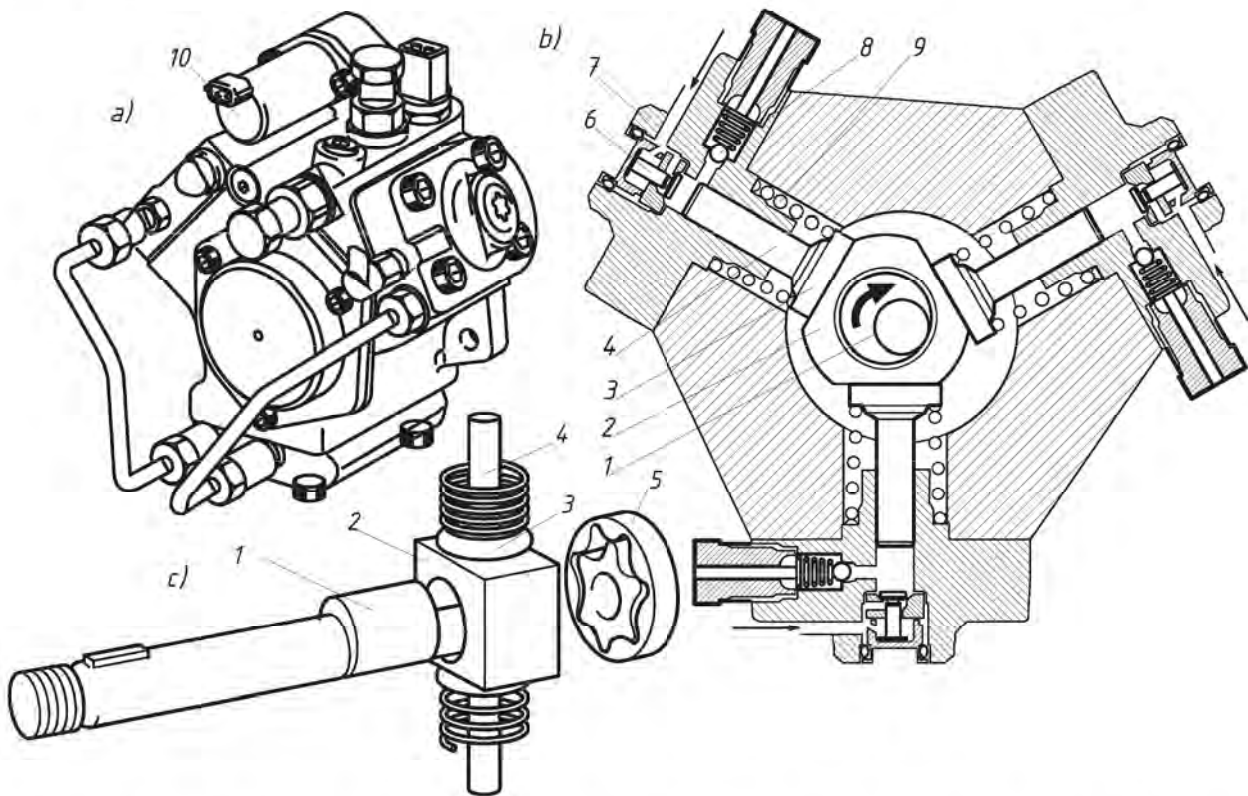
Delphi type DFP3 plunger pump for Common Rail systems of high-speed diesel engines: *a* – general view of a three-plunger pump with pump sections located in the same plane at an angle of  $120^\circ$ ; *b* – diagram of a three-plunger pump; *c* – diagram of a pump with an opposed arrangement of pumping sections; 1 – shaft with drive eccentric; 2 – rotor; 3 – plunger pusher; 4 – plunger; 5 – booster pump; 6 – suction valve; 7 – plunger sleeve with cover; 8 – delivery valve; 9 – return spring; 10 – flow control valve (adapted from [74])
